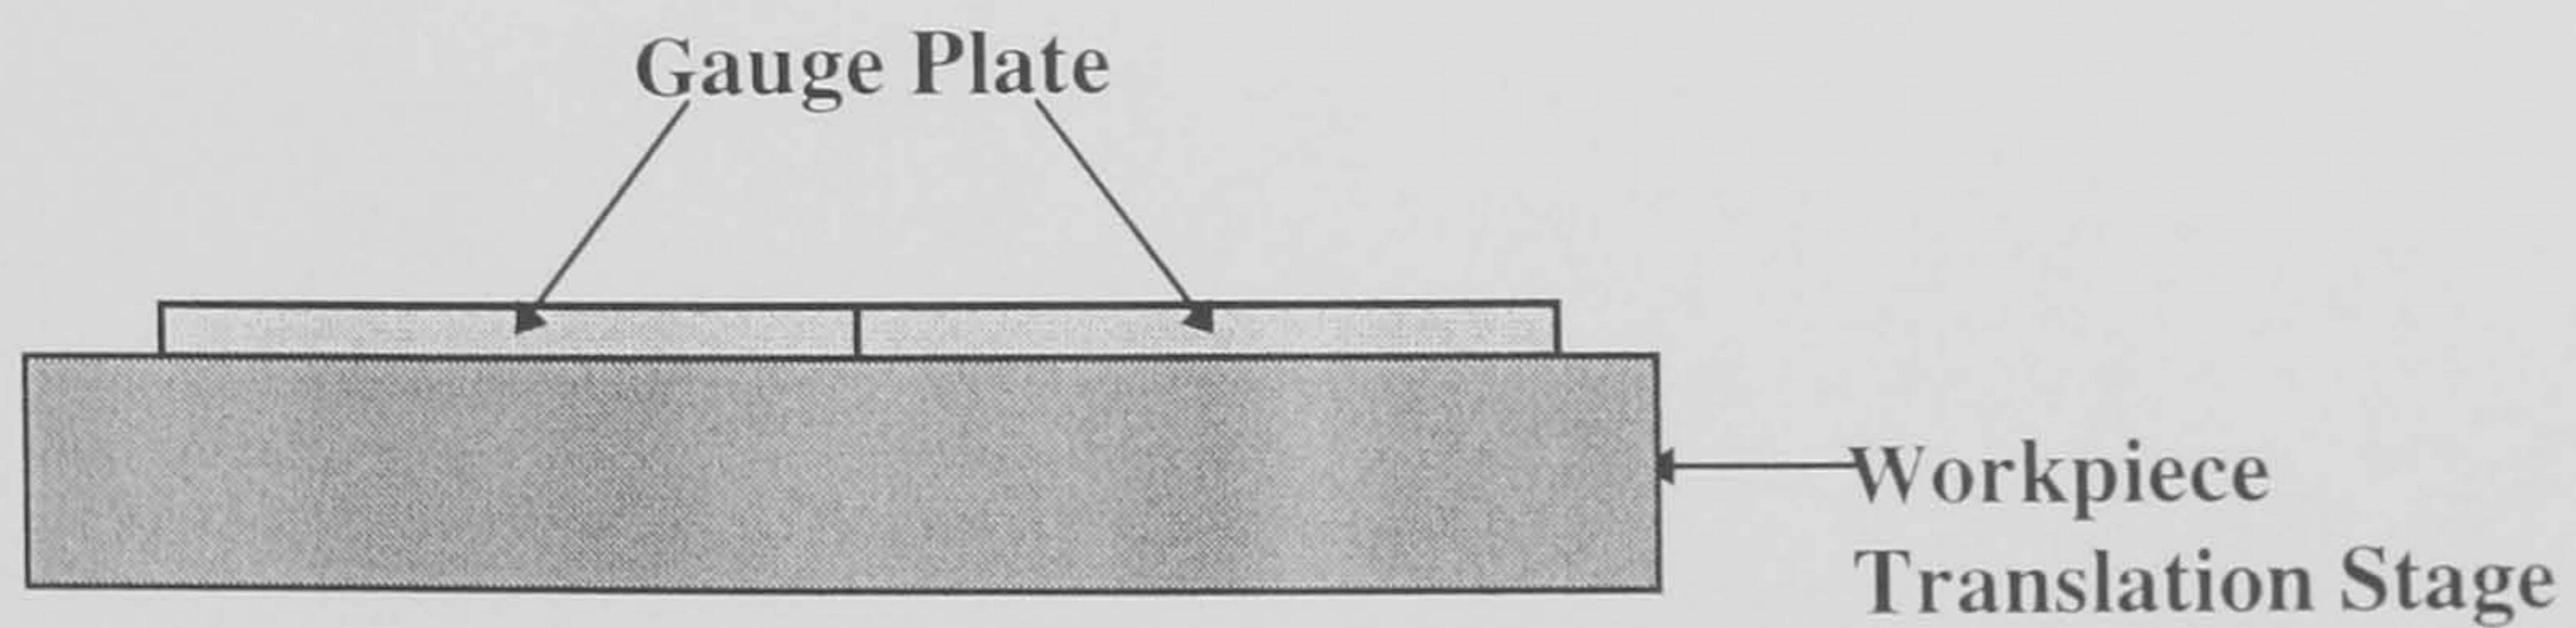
Unclamped Geometry For Laser Welding
